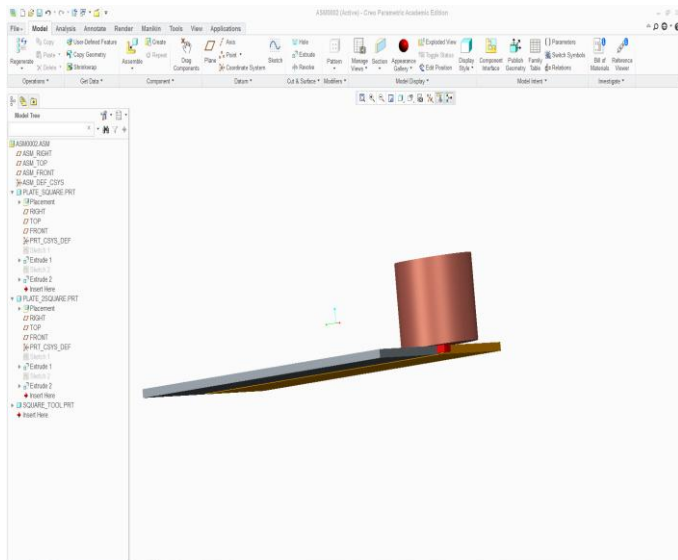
3D Model of round tool and weld plates assembly
